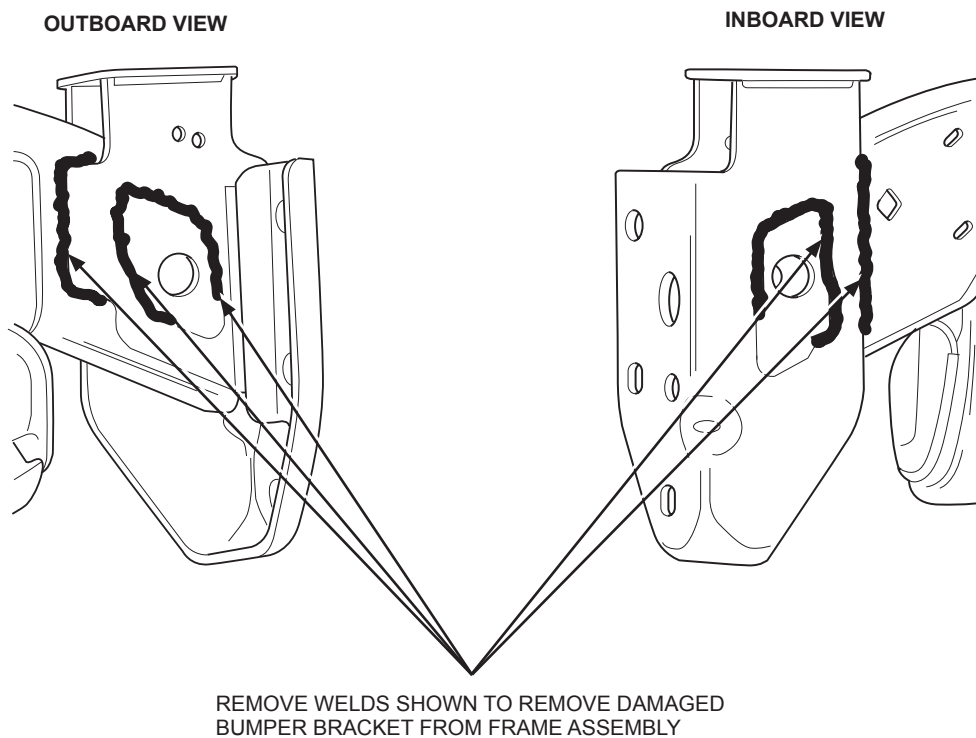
VIEW OF FRAME SHOWING REAR BUMPER BRACKETS
